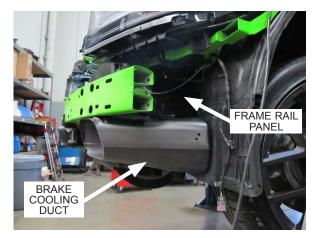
I: Remove both brake cooling ducts (Driver side shown)
